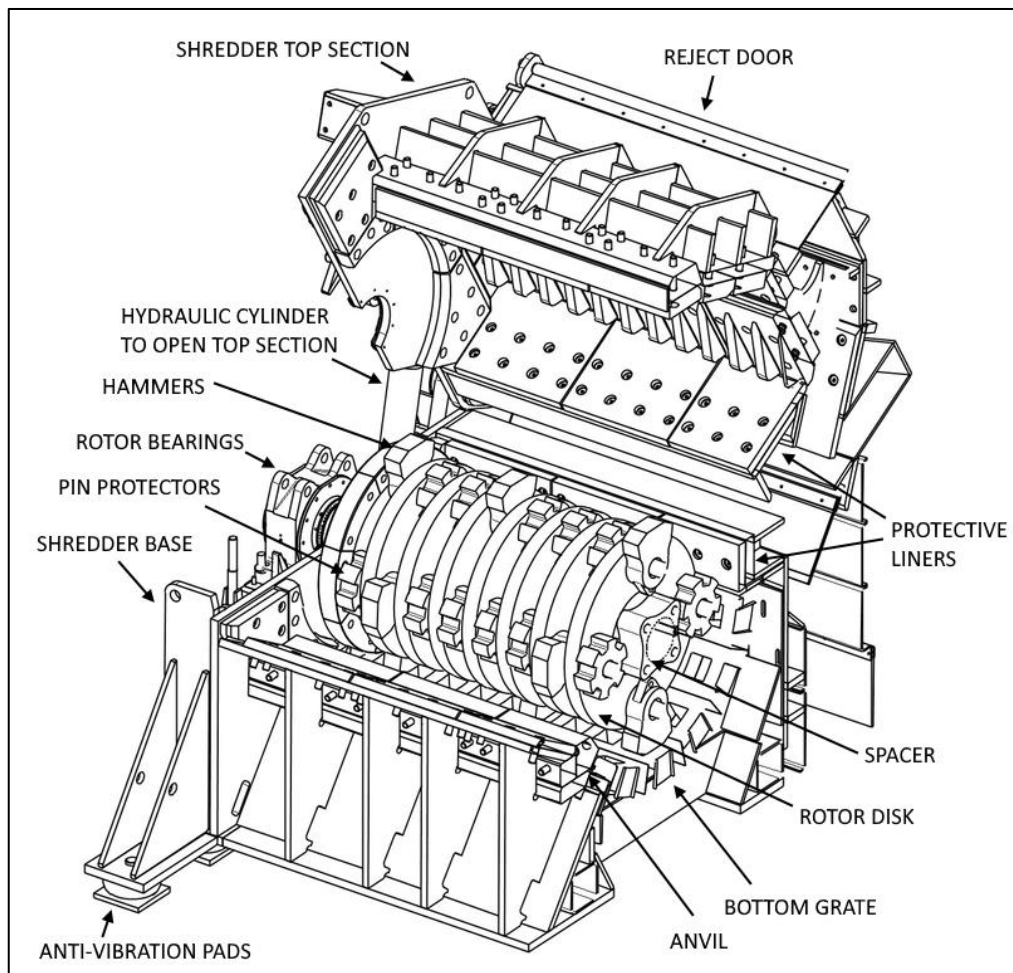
Section sketch of an example bottom discharge hammermill shredder.
